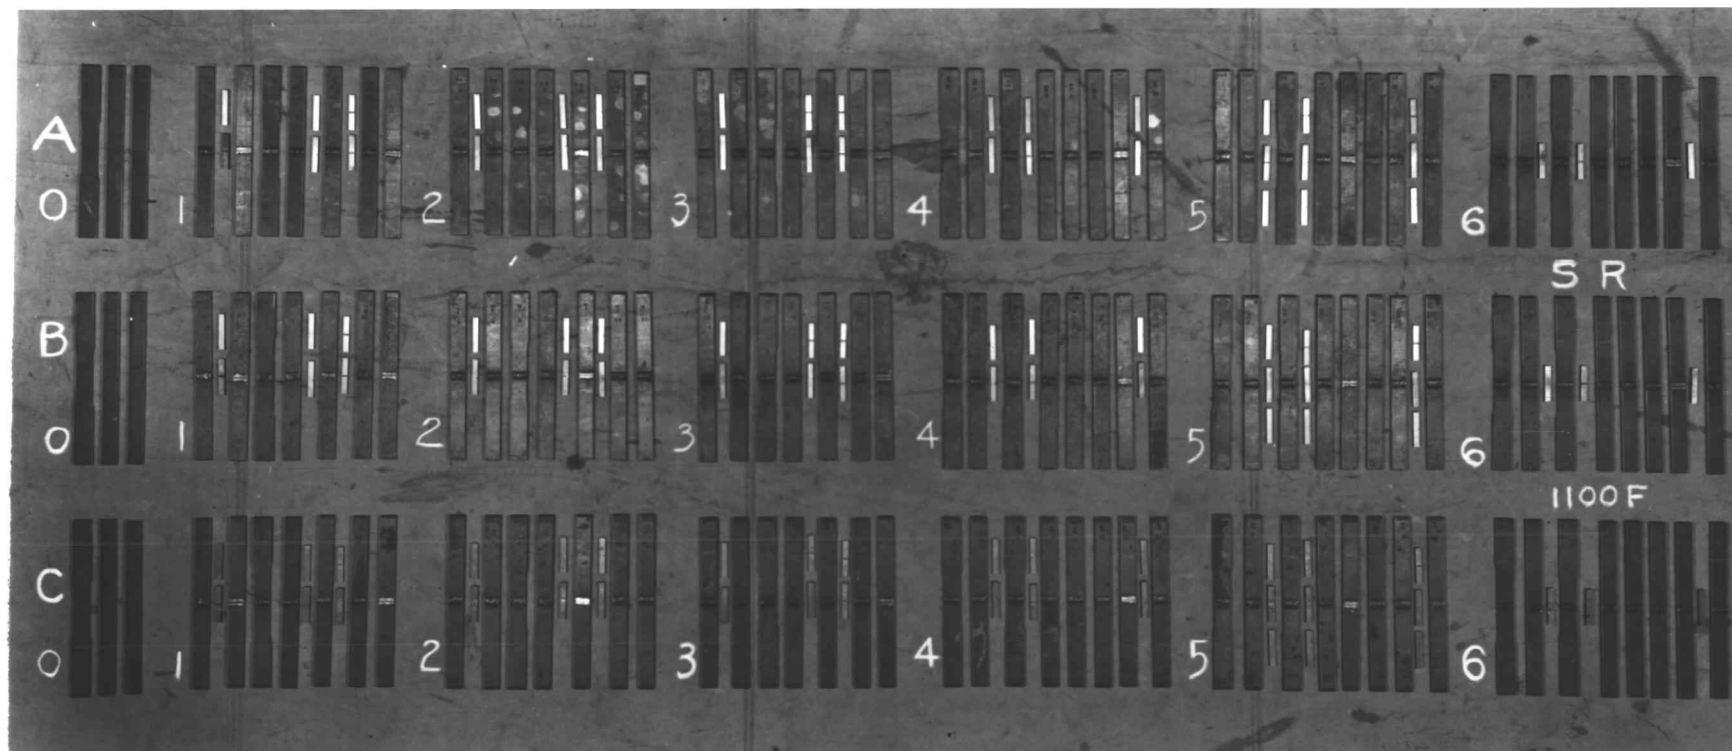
Specimens Used in Test Program, In Position as in Uncut Plate
